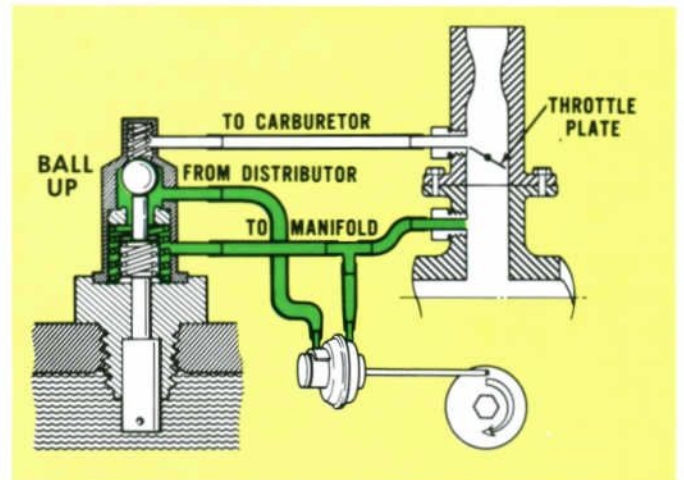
VACUUM CONTROL VALVE (ENGINE OVERHEATING)
